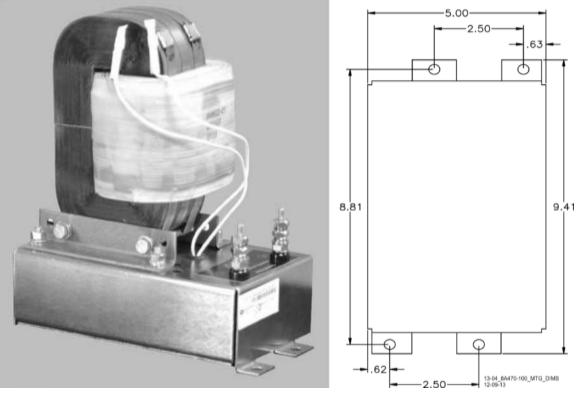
AC Code Unit, 8A470-100, with Mounting Dimensions
